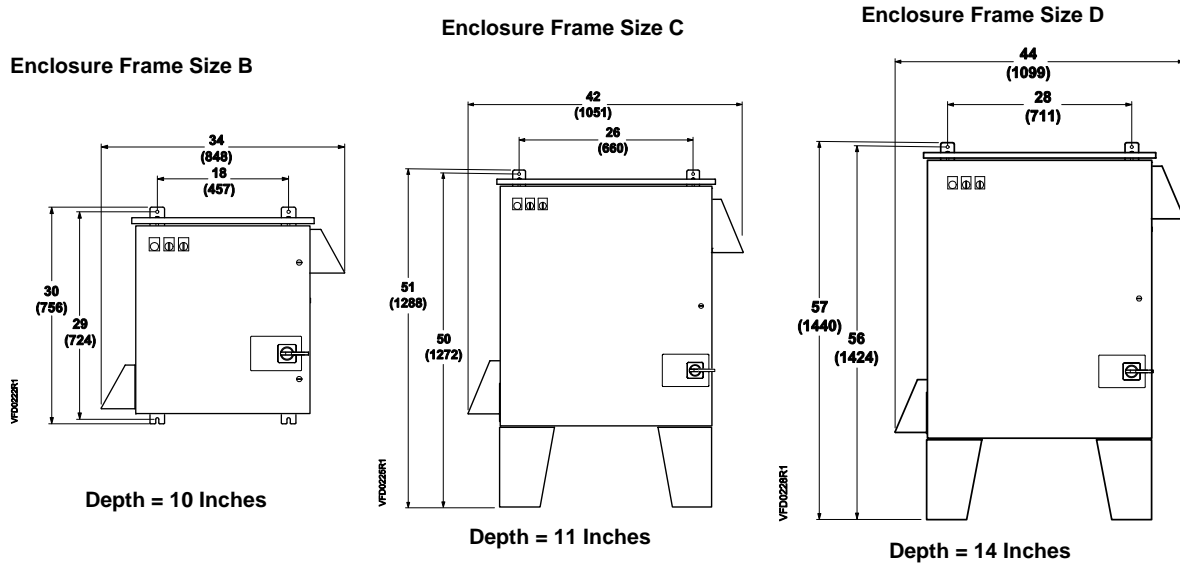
Type 3RHE Enclosure Dimensions in Inches (Millimeters).
